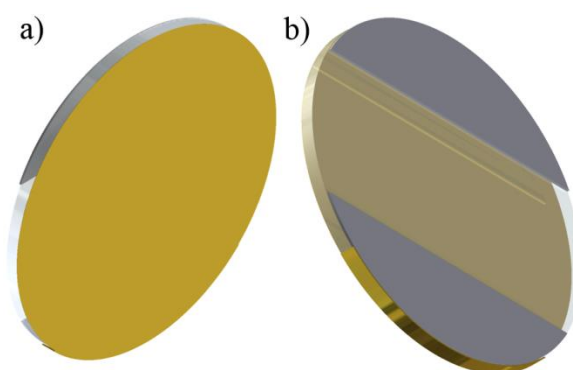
CAD drawings of a) the front and b) the rear sides of the photocathode.
